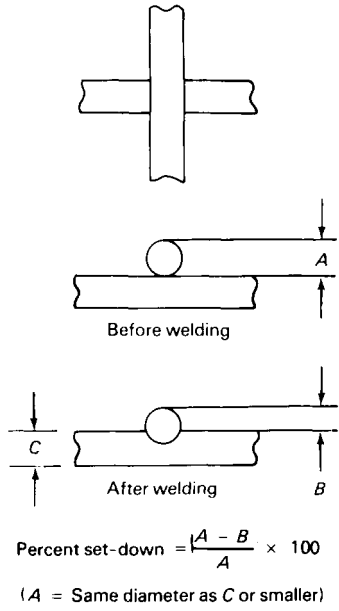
Illustration of cross-wire weld and set-down measurement
